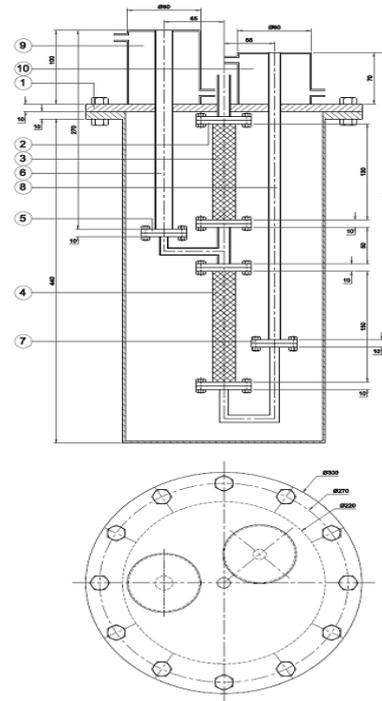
Assembly drawing of apparatus 1-Top Cover Plate,2-Regenerator Flange,3- First stage Regenerator,4-second stage Regenerator,5-First stage Pulse tube flange,6-First stage Pulse tube,7-Second stage Pulse tube flange,8-Second stage Pulse tube flange,9-Water jacket First stage,10-Water jacket second stage
